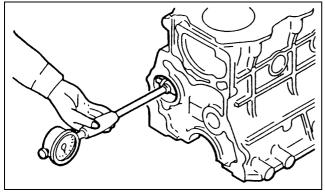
Measuring bore in crankcase (bushing) for camshaft
